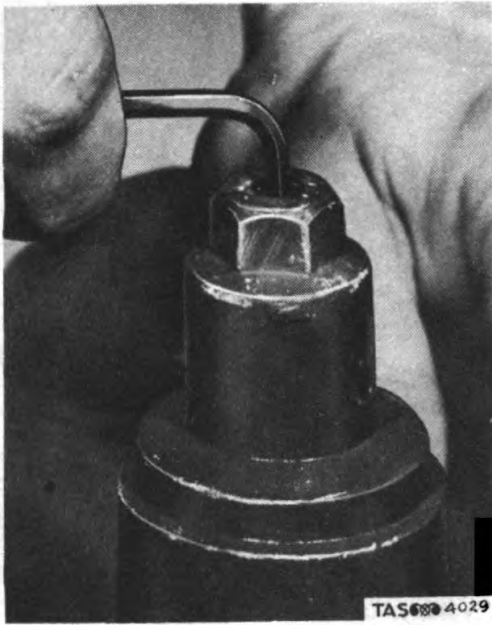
Adjusting Pressure Regulator, Using Hollow Set-Screw Hexagonal Wrench on the Adjusting Screw. Seal Has Been Removed.
